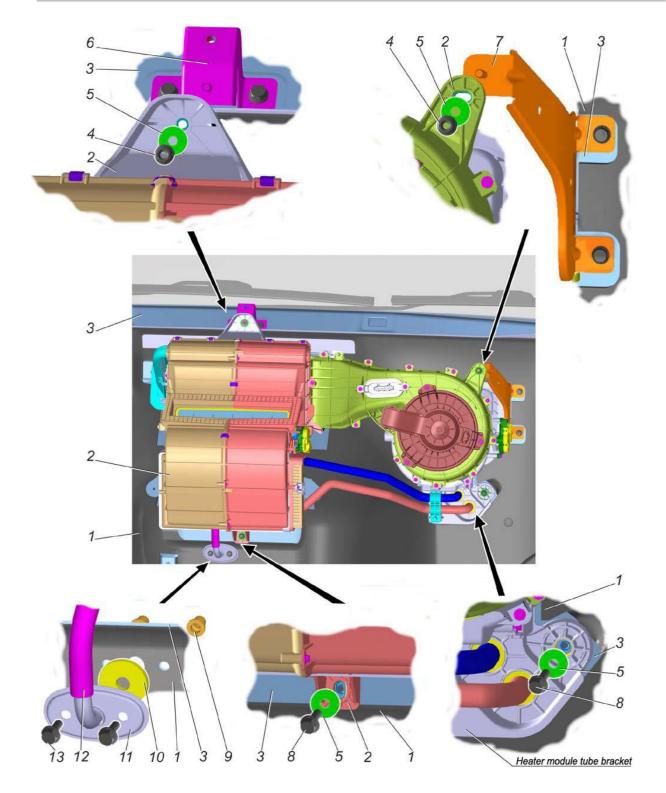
Heater module installation: 1 – front panel insulation; 2 – heater module; 3 – front panel; 4 – nuts; 5 – washers; 6 – heater bracket; 7 – fan bracket; 8 – bolts
